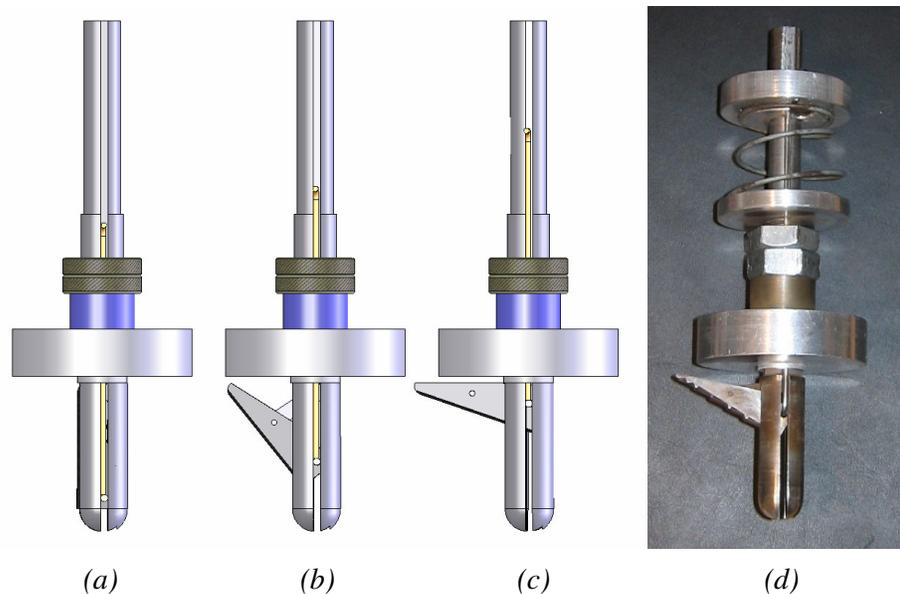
The patented milling tool. (a) CAD model with closed up cutting sheath. (b) CAD model with partially expanded cutting sheath. (c) CAD model with fully expanded cutting sheath. (d) Photo of a prototype.
